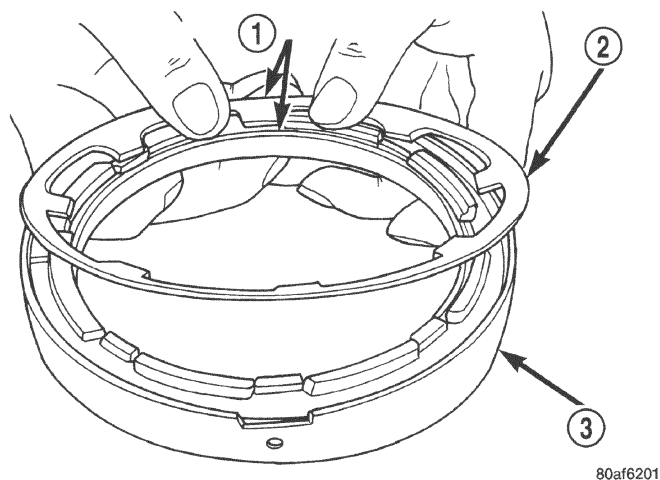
Stagger 2/4 Clutch Plate Pads
